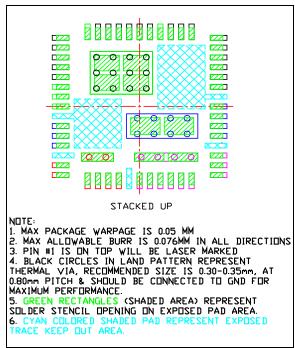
Stack-Up of Pad Layout and Solder Paste Stencil and Notes.
